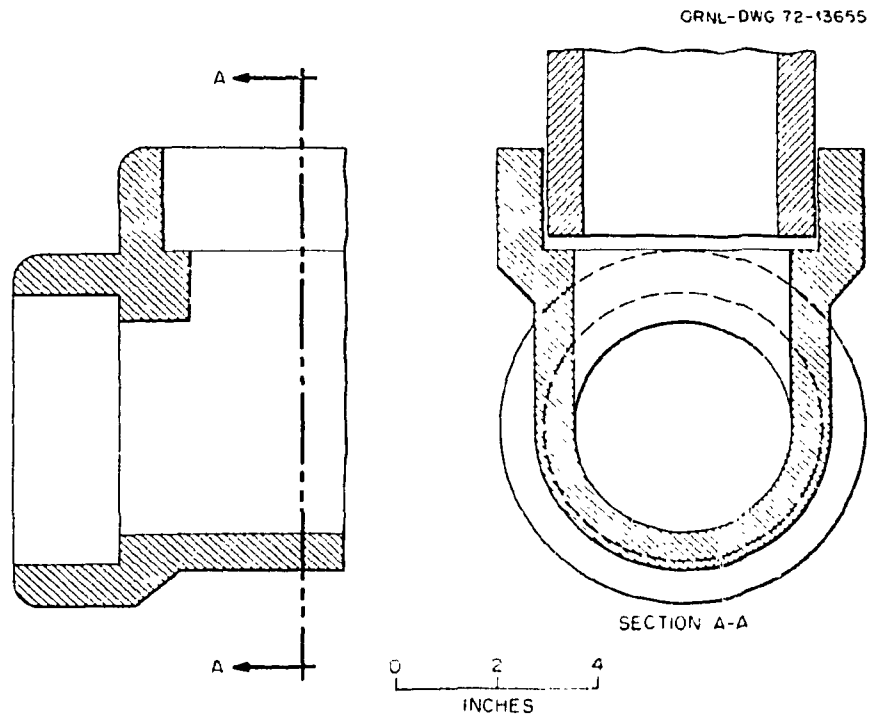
ANSI B16.11 tee, 1-in.. 3000-lb-class, sched-80 pipe.
